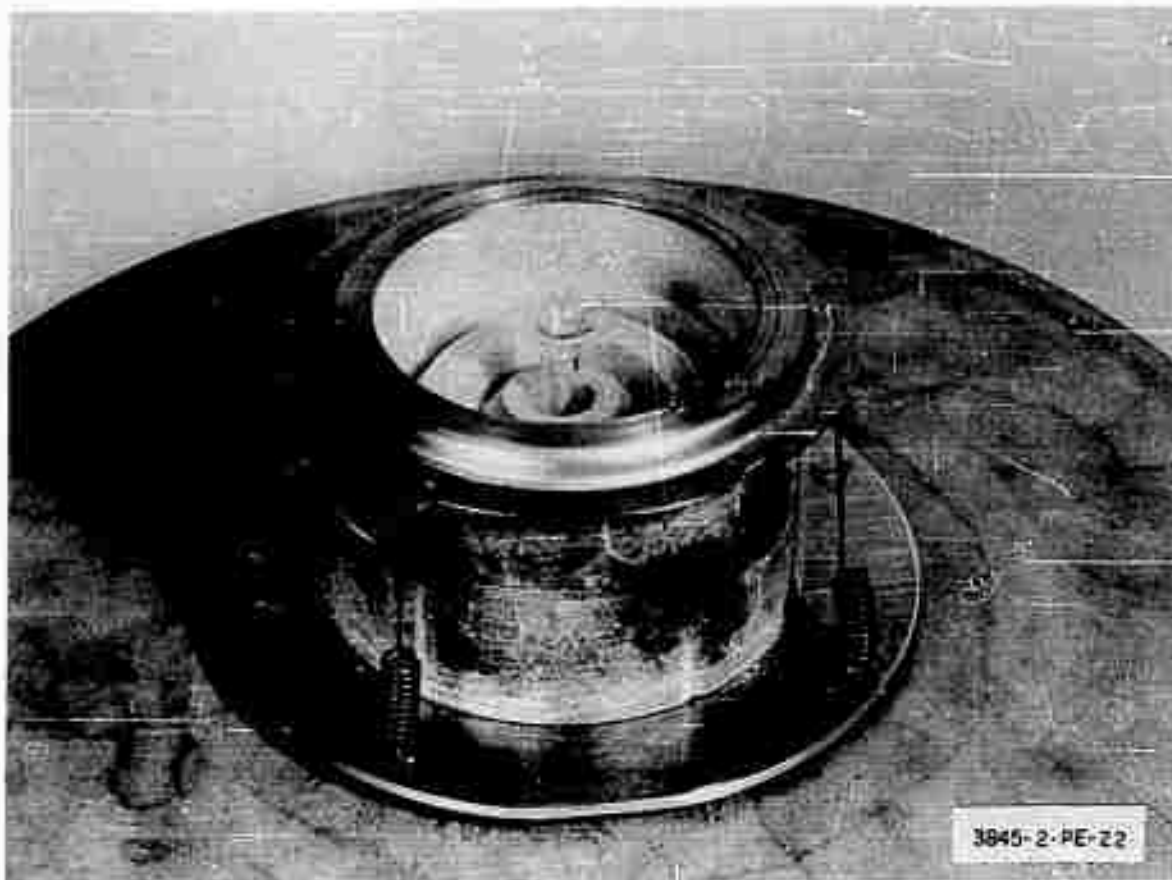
Soldering Jig, Anode Subassembly WX-4209
